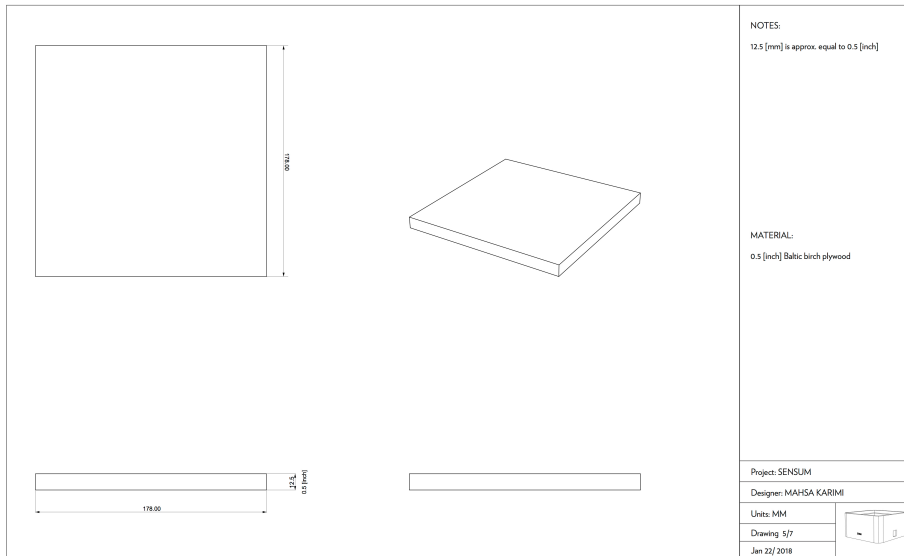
Technical drawings of Prototype Two (Mahsa Karimi)
